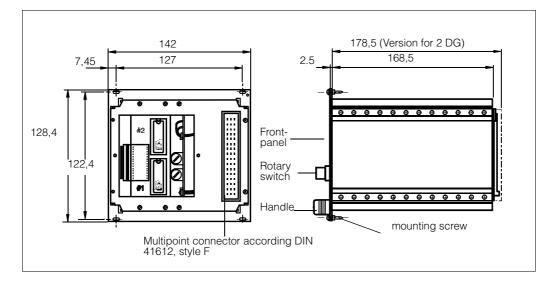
Dimensions in mm transmitter FMG 573 Z/S
